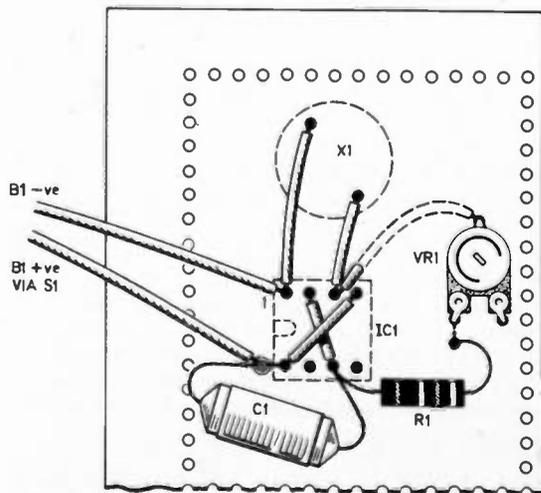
Layout of the components and wiring up details on the plain matrix board. Wiring on the top of the board is shown dotted.
